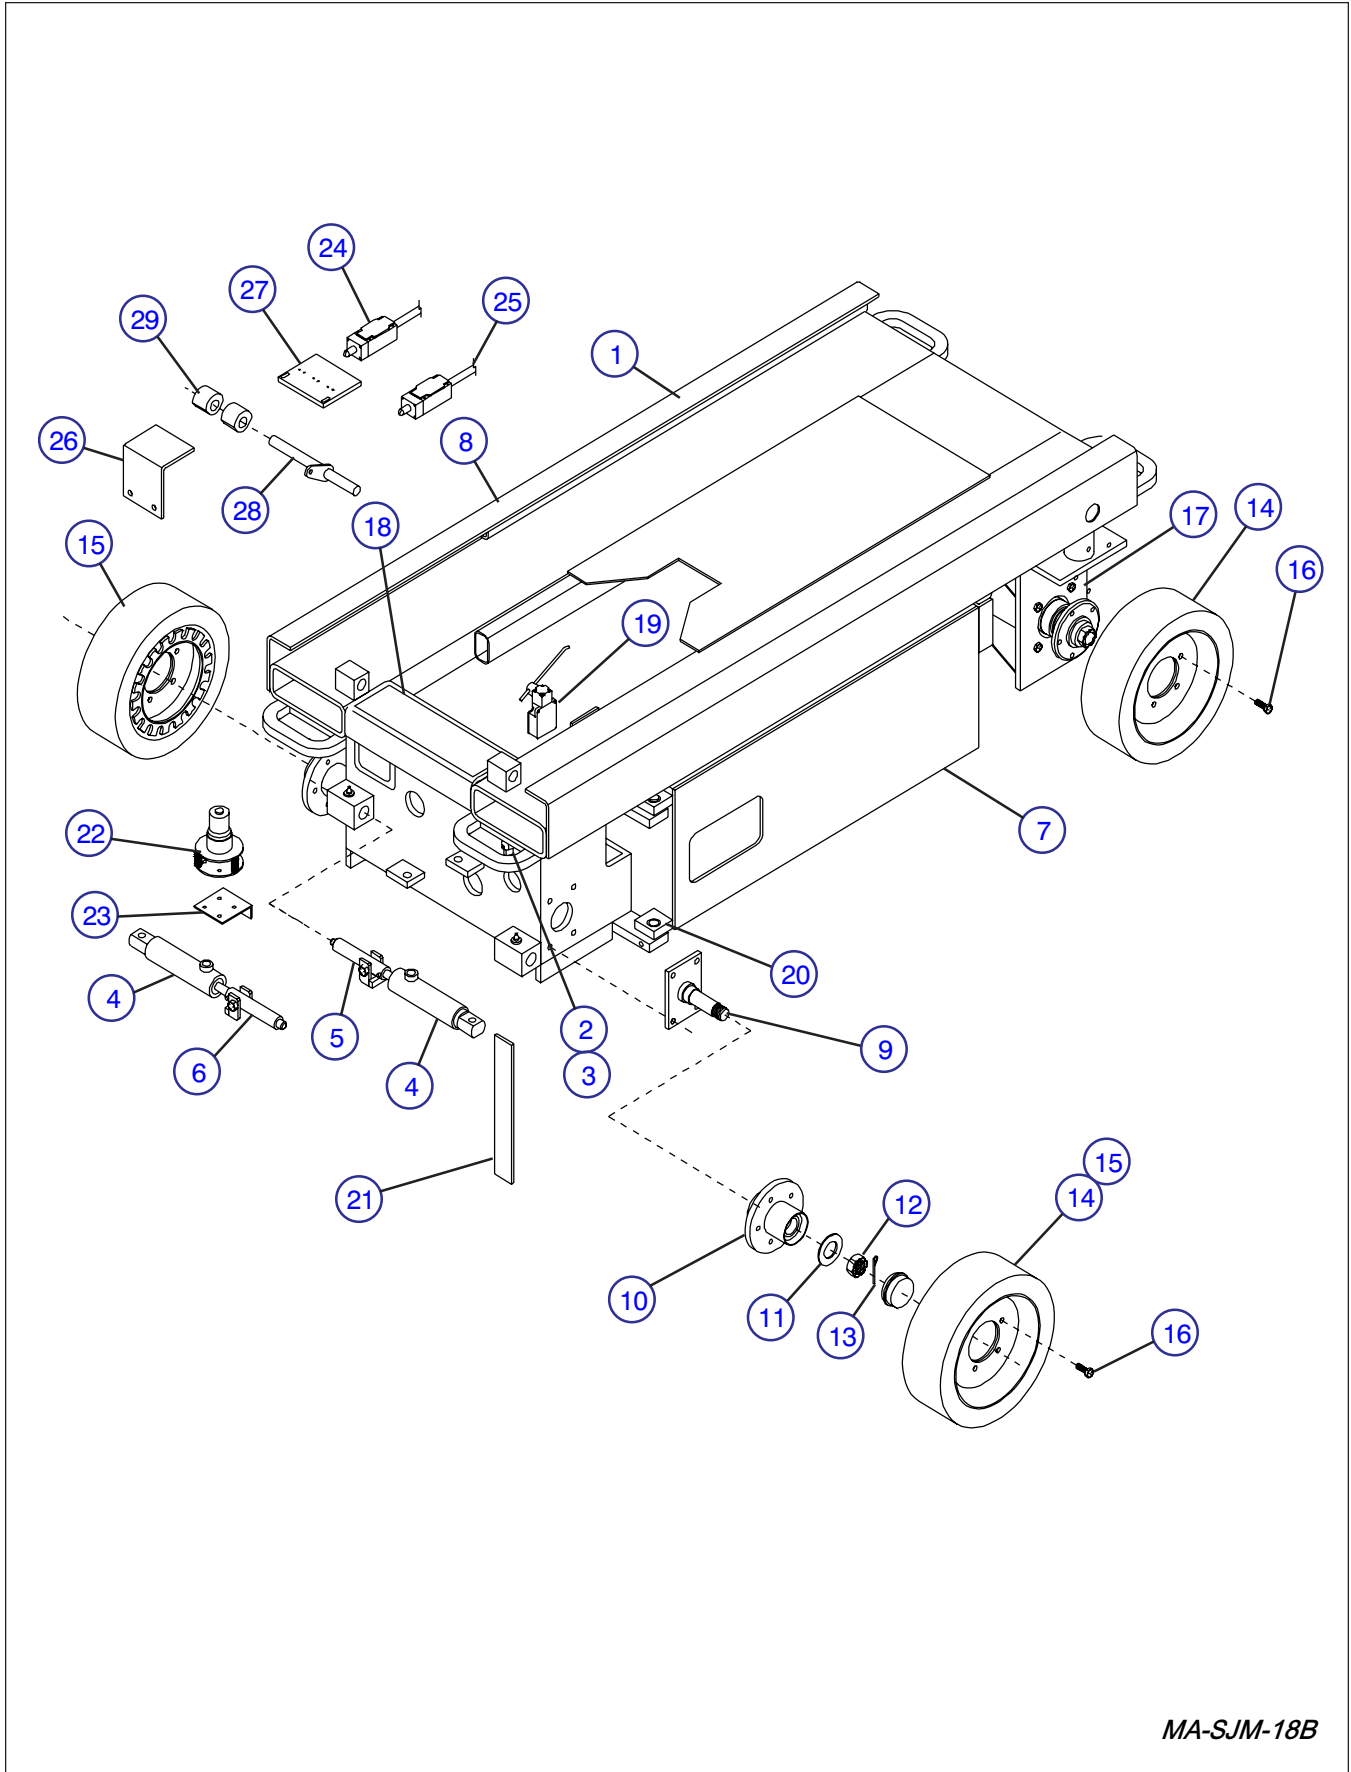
LIFT CYLINDER ASSEMBLY - Model 3219
